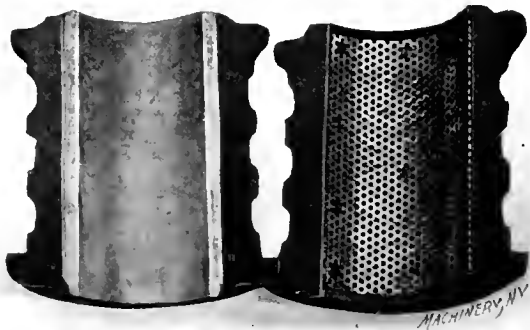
Main Shaft Glyco Bearing for Large Gas Engine, Before and After Babbitting.
